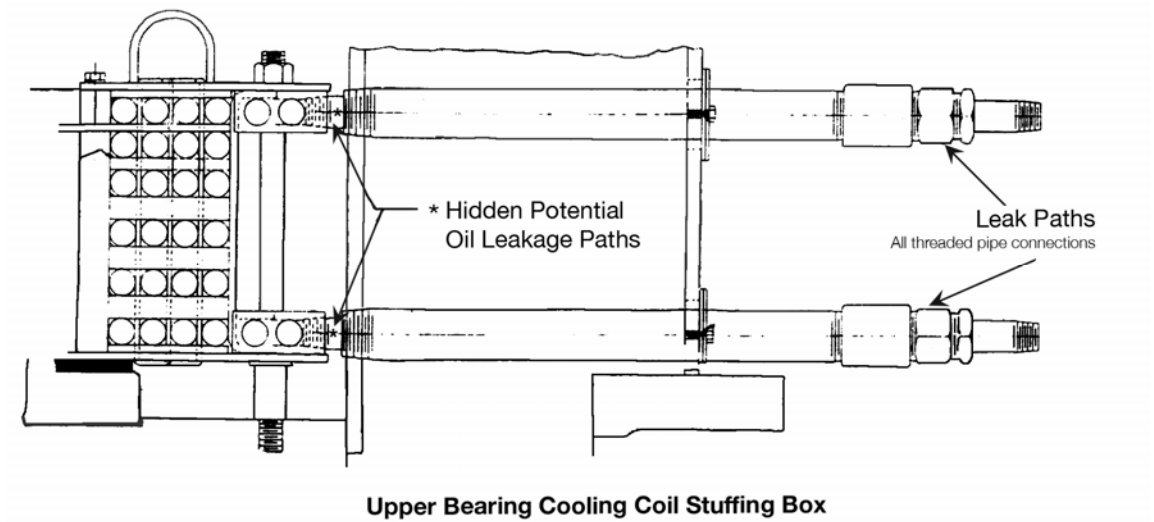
Upper Bearing Cooling Water Lines Oil Reservoir Penetrations
